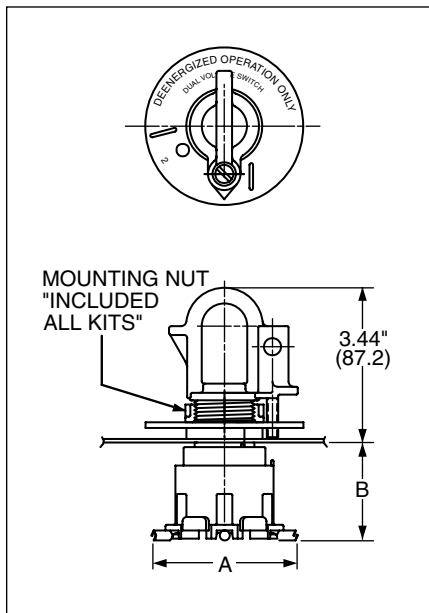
Switch with one piece rigid thermo-plastic, padlockable, hotstick handle.
